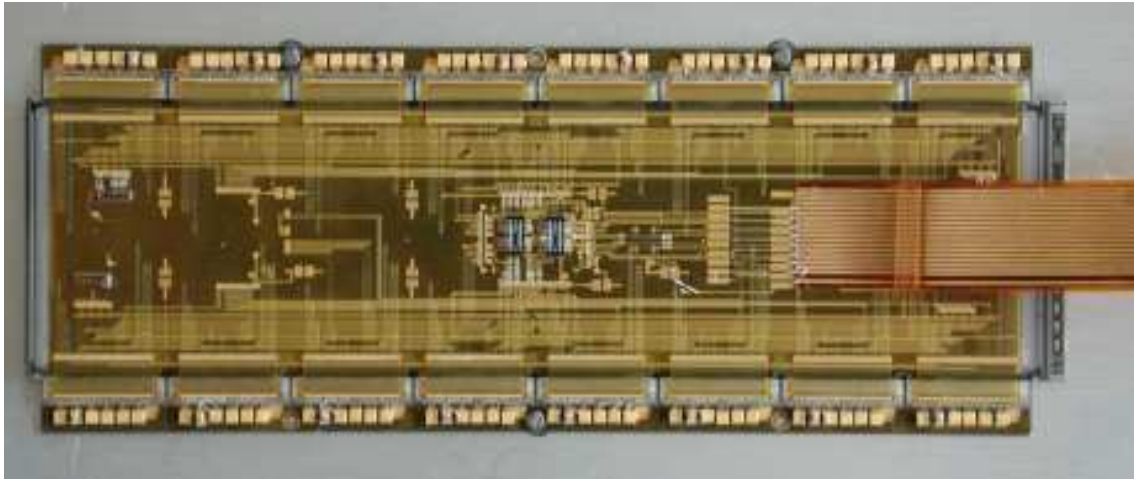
Prototype Module of the CMS Pixel Barrel Detector using the PSI 43 readout chip.
